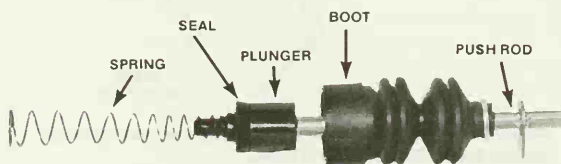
Parts of a slave cylinder assembly. (American Motors Corporation)
